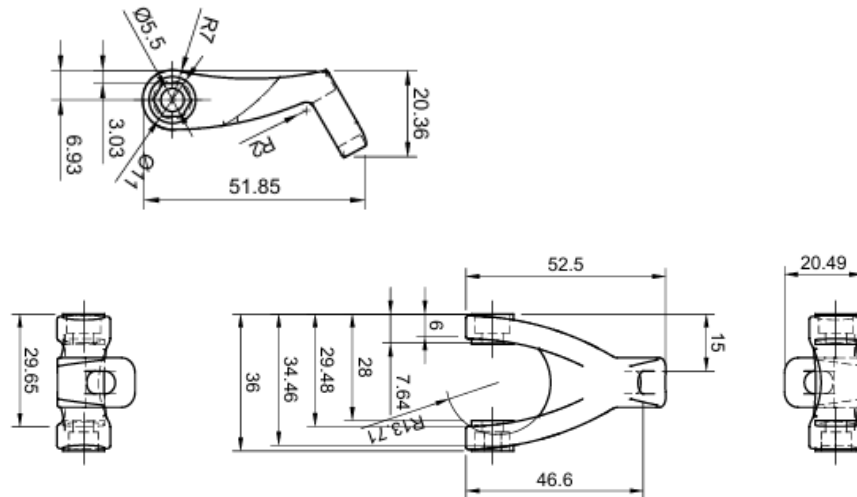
Handlebar Clamp Body CAD Drawing and Dimensions Part 7
